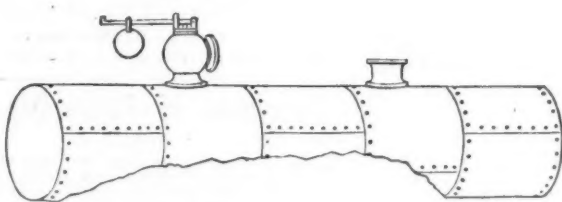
Top of Steam Drum, Shown in Fig. 6, After Explosion.
